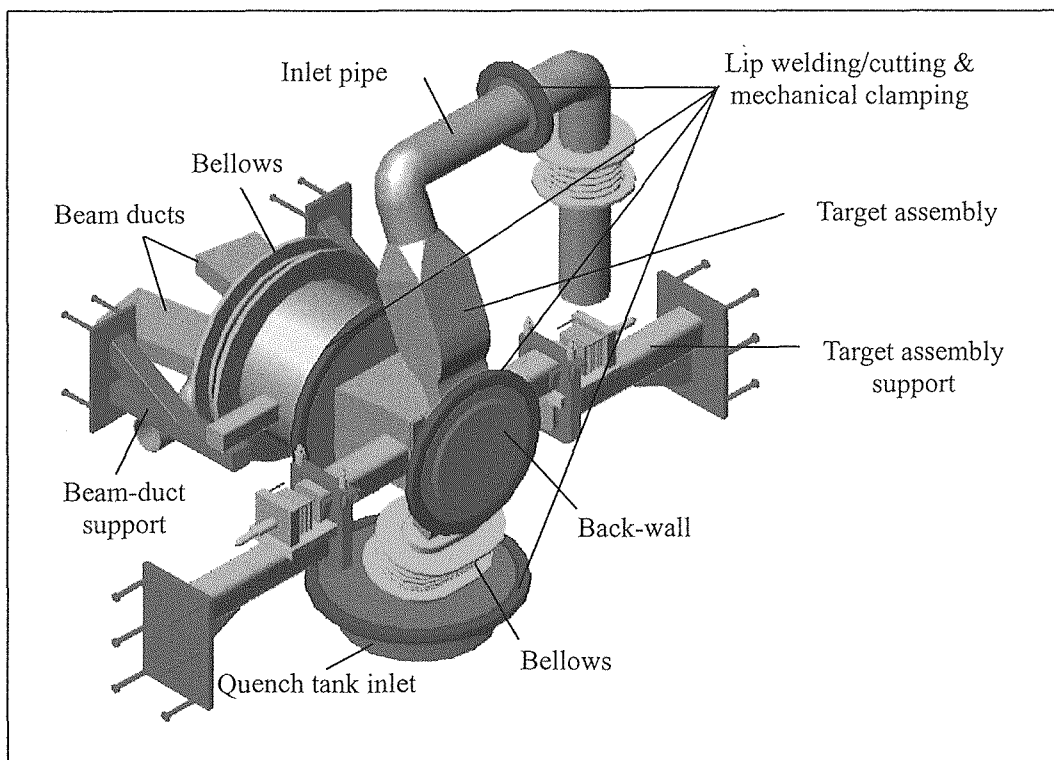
Three-dimensional view of the IFMIF target assembly.
